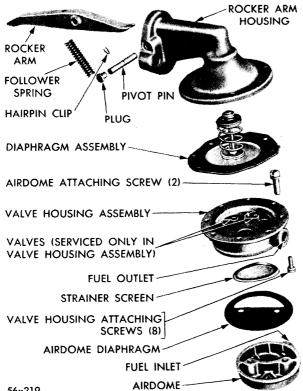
Fuel Pump (Exploded View Model M 961 S)
